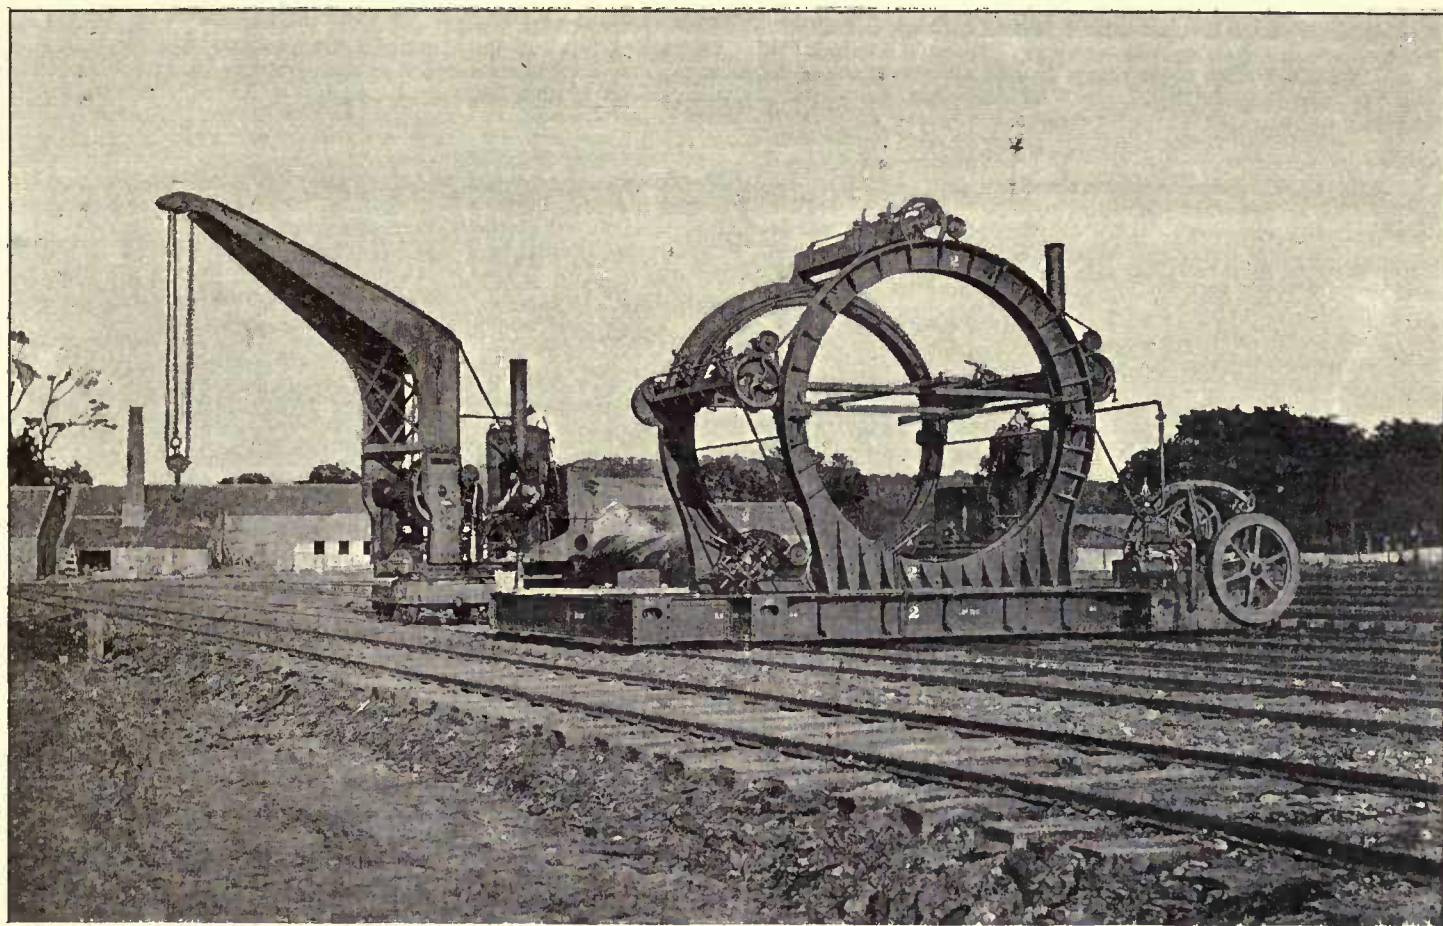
TUBE DRILLING MACHINE AND TRAVELLING CRANE ON DRILL ROAD.
